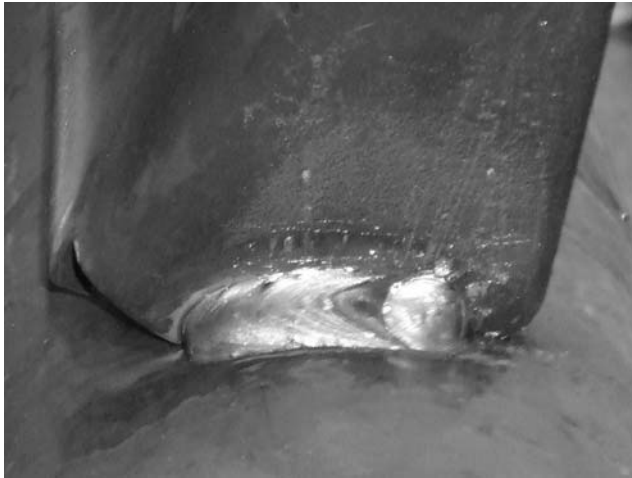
Final air chamber bracket weld (outside of bracket)
